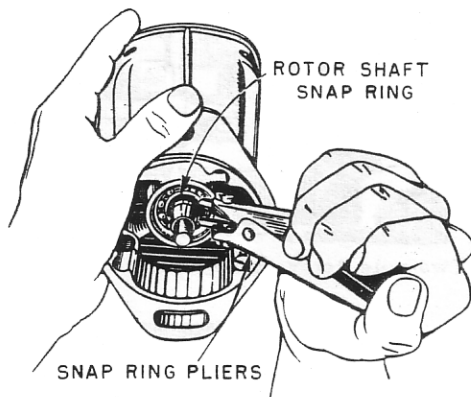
Replacing Rotor Drive End Shaft Snap Ring
